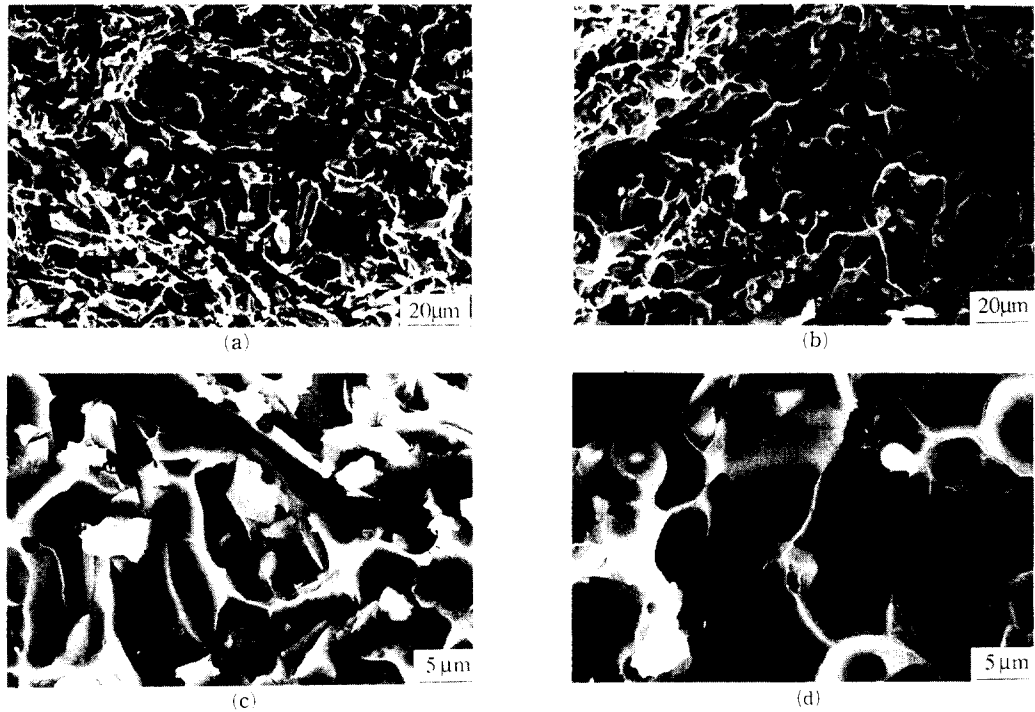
Fracture surfaces of Al/Al₂O₃ composites after tensile test at (a) room and (b) elevated temperature(350°C), (c) and (d) show high magnification view of (a) and (b)
